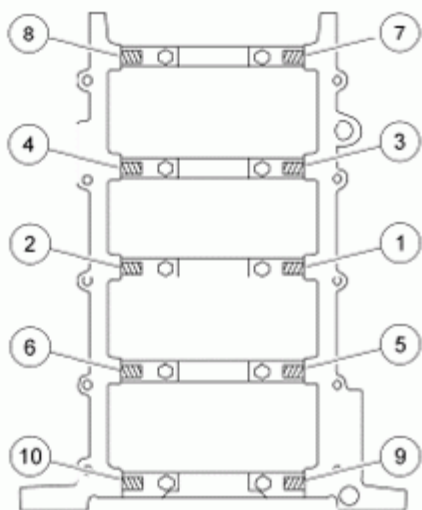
Identifying Main Bearing Cap Fasteners Tightening Sequence
